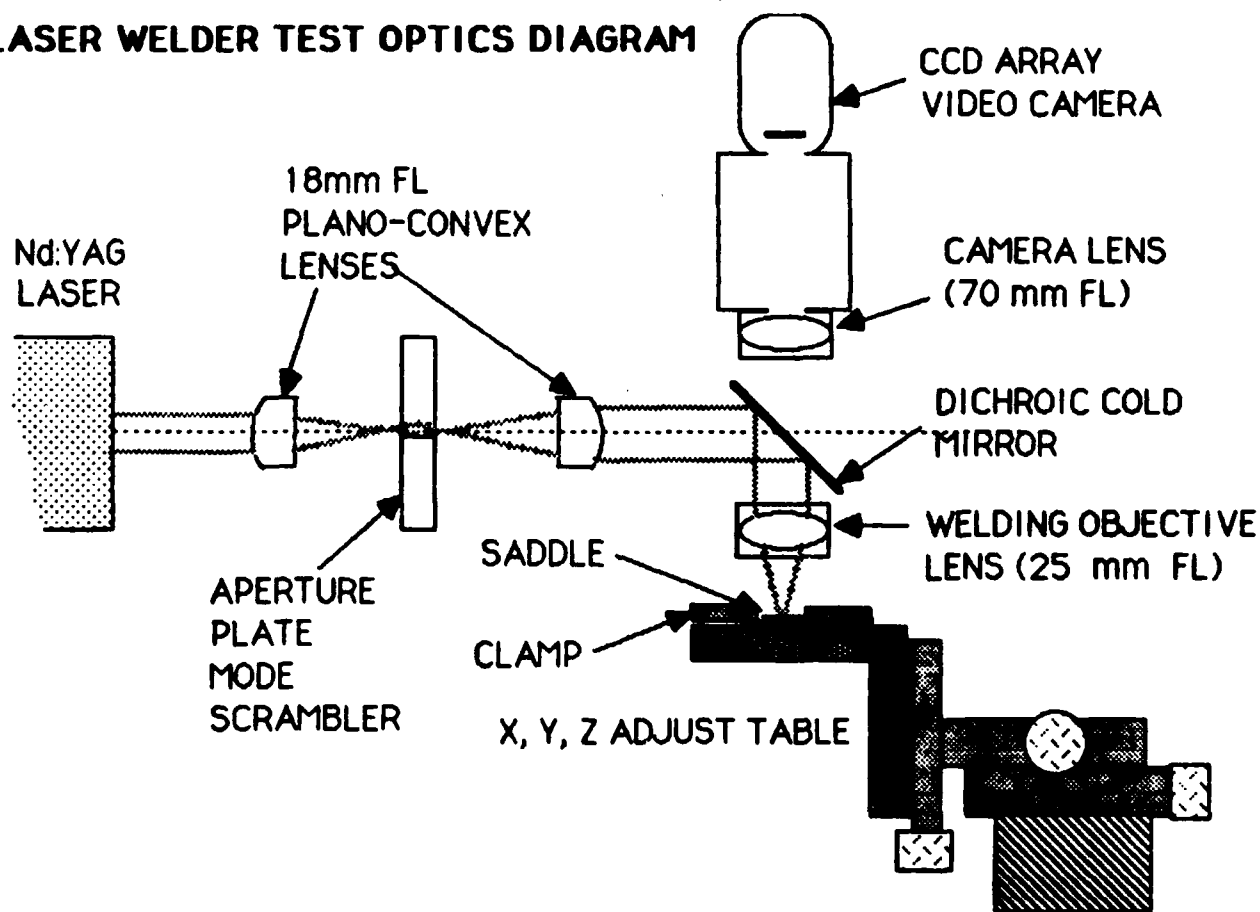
Experimental Imaging Optics for Welding Experiments. Light illumination to pass through to the video camera, which is used to locate the workpiece in the desired position before initiating the weld pulse. The 18 mm focal length lenses produce a small enough image of the laser mode pattern to fall within the 330 micron diameter hole in the plate, thus losing very little
